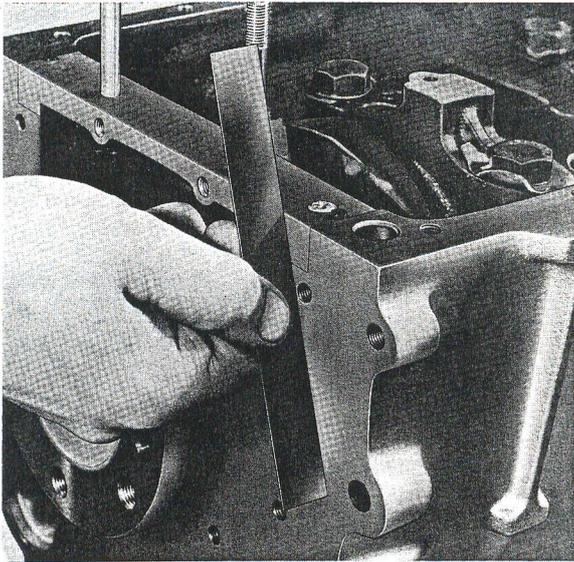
Aligned view of the connecting rod cap with a straightedge to check its alignment against the rear face of the cylinder block.
